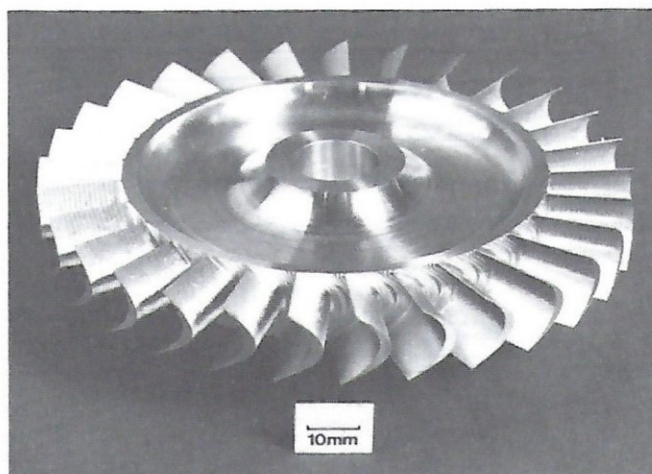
Photograph of 0.17 scale test axial turbobrake rotor
